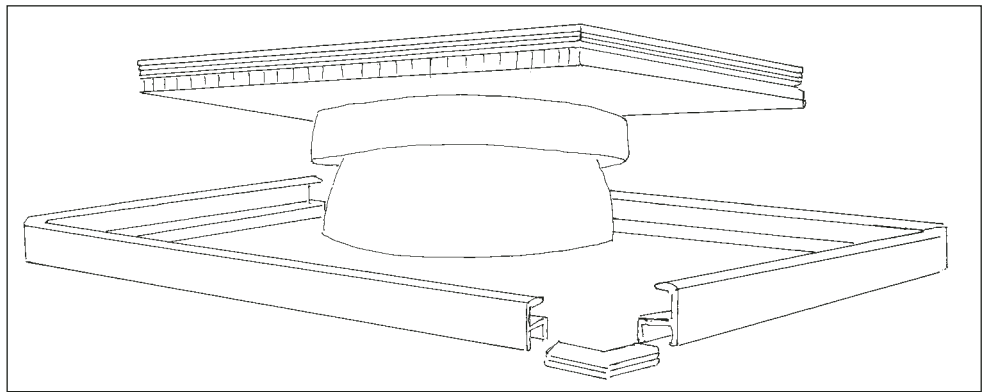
A lazy susan can be a helpful tool when assembling the frame package in an aluminum sectional frame.
